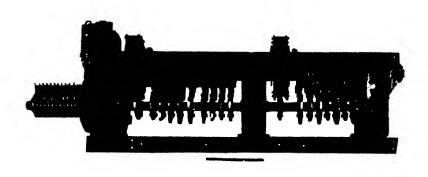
Camshaft-contactor group assembly with electric motor drive.
